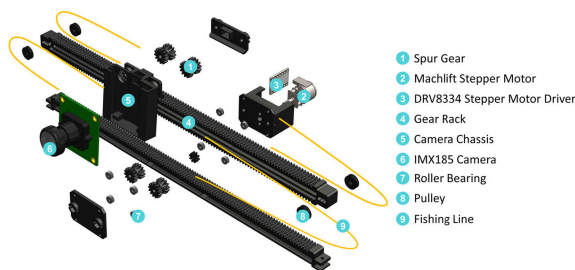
Components breakdown of cascaded bidirectional linear actuator camera assembly design.
